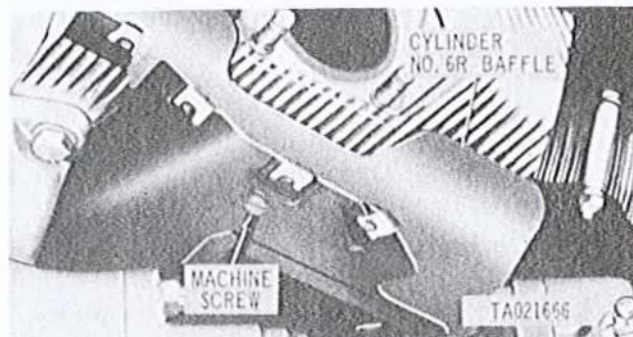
Disconnecting or connecting lower right engine shroud.
